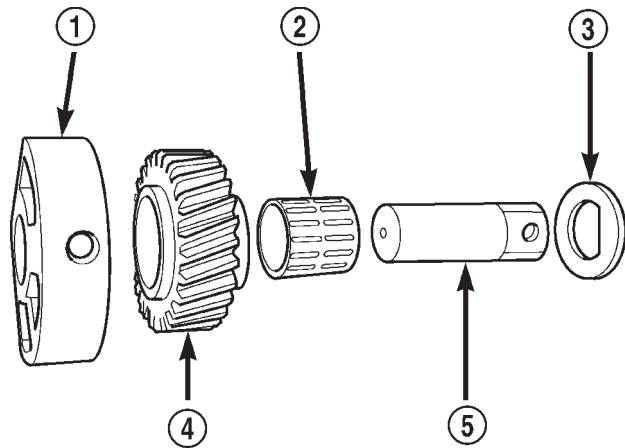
REVERSE IDLER SHAFT/SUPPORT BOLT
